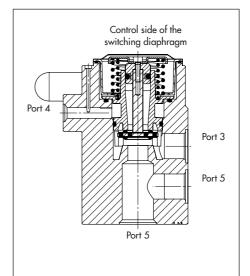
Type 3756 Booster Valve with switching diaphragm
